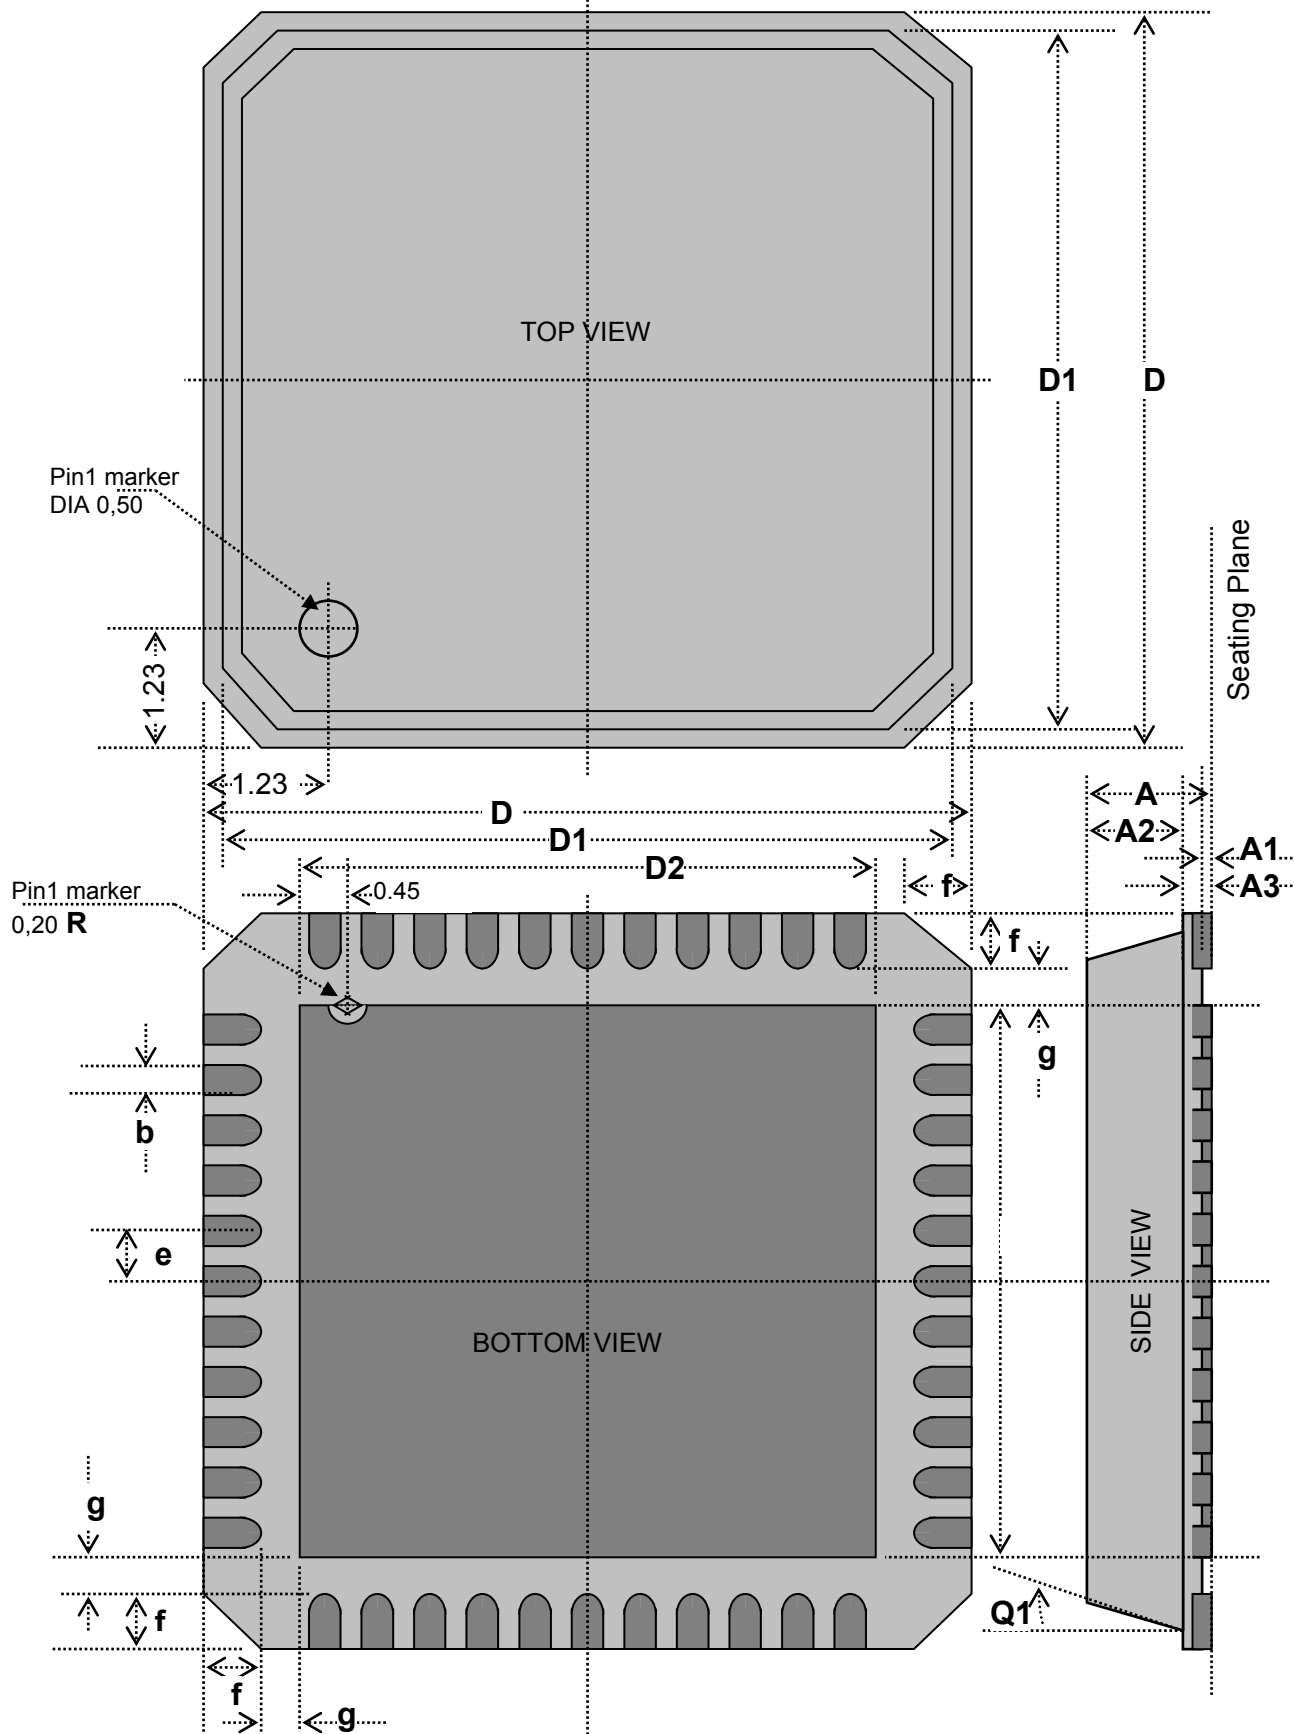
Package drawing for the RangeMaster2 RFID State Machine (AN238C04)
